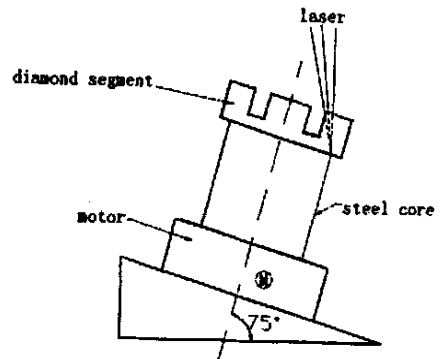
The schematic diagram of reverse welding diamond core drill
